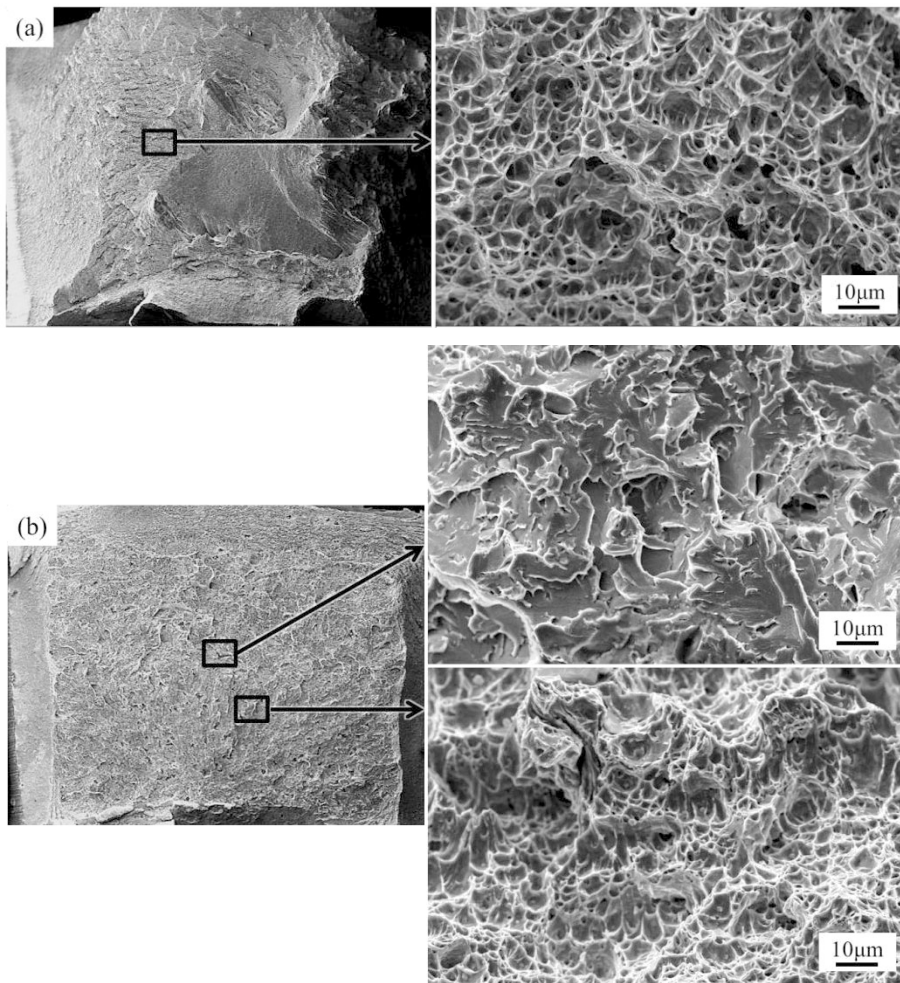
SEM micrographs showing fracture morphology of impact samples of weld metal: (a) a#; (b) b#
